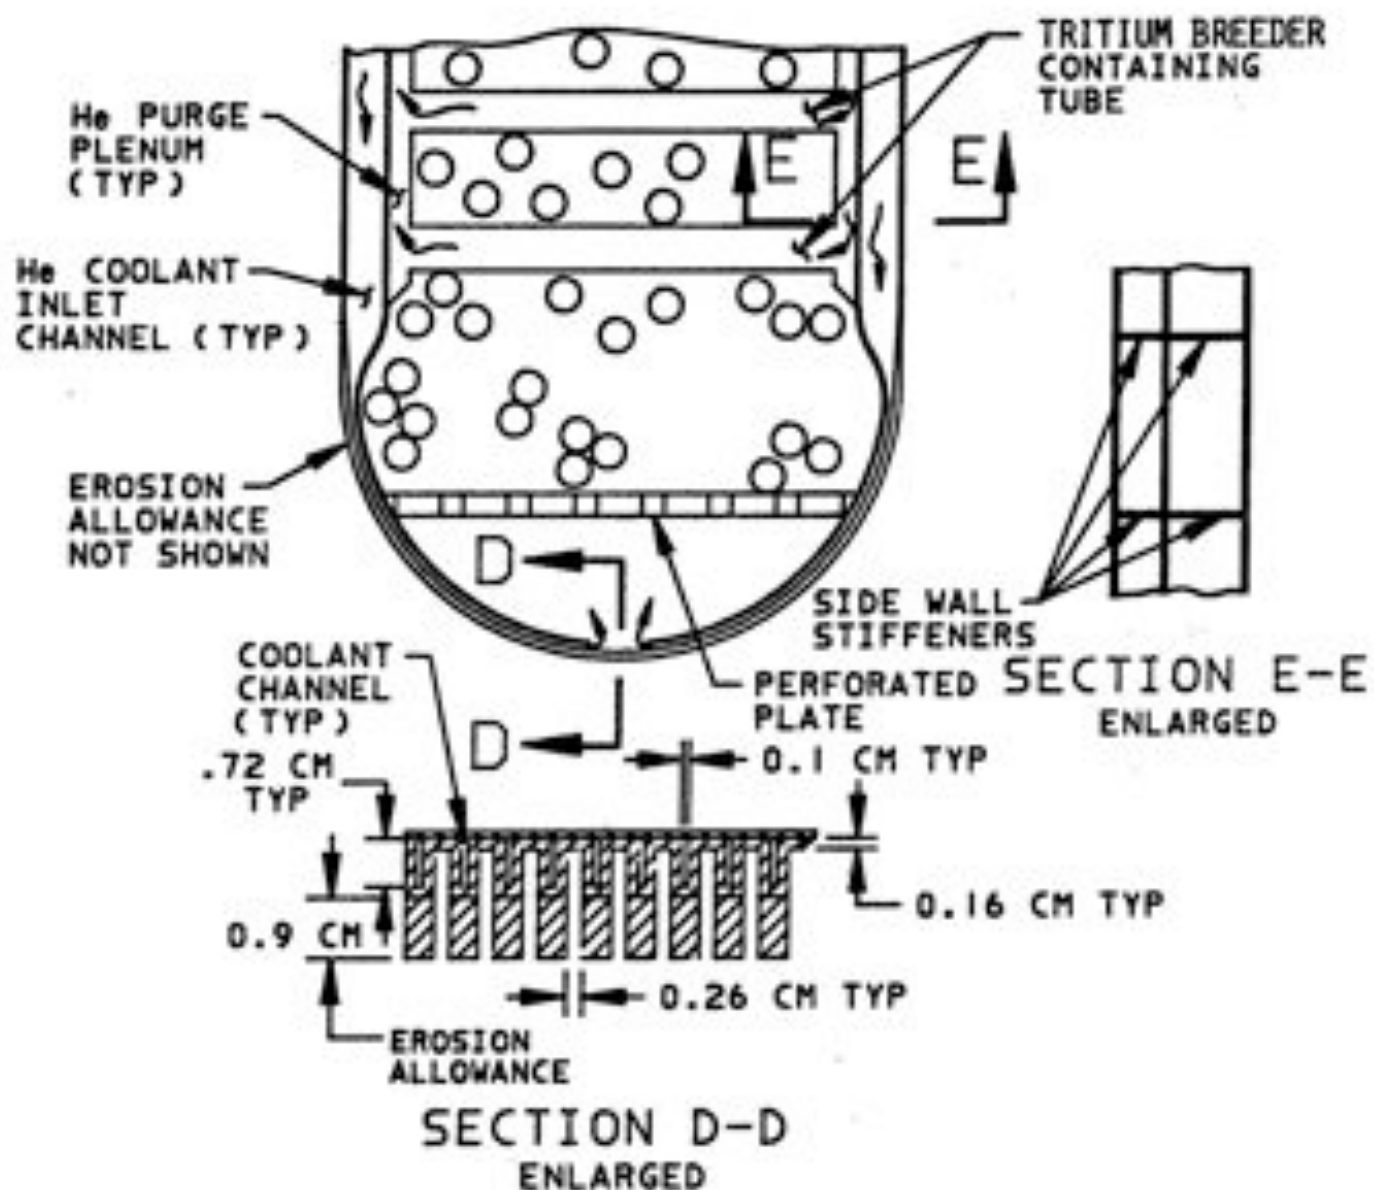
E.5. Enlarged View Of The Front Of a Module Showing Corrugated First Wall, Side Wall Stiffeners and Tritium Breeder Containing Tubes (not to scale).
